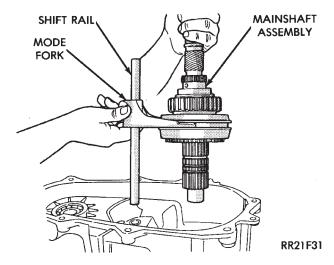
Installing Mainshaft And Mode Fork Assembly
